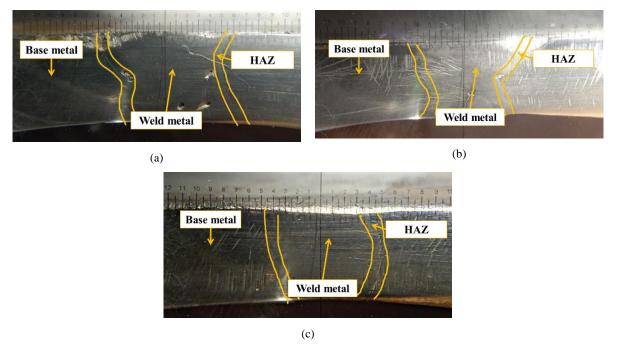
Macro photo of zigzag welding movement results at the welding current of (a) 60 A, (b) 80 A, and (c) 100 A.
